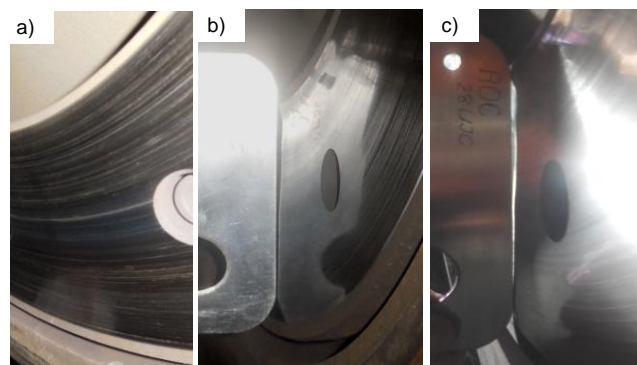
View of the friction surface of EN76 026 vehicle brake discs: a) scratches on different diameters, b), c) view of linear wear around the inner radius [A.M. Rilo Cañas]
